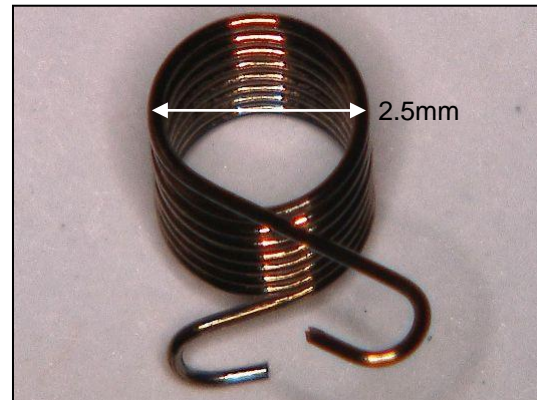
A representative meso-scale torsion spring. The wire diameter is 0.175mm, the spring length is 3.8mm, the coil diameter is 2.5mm, and the wire material is Elgiloy.
